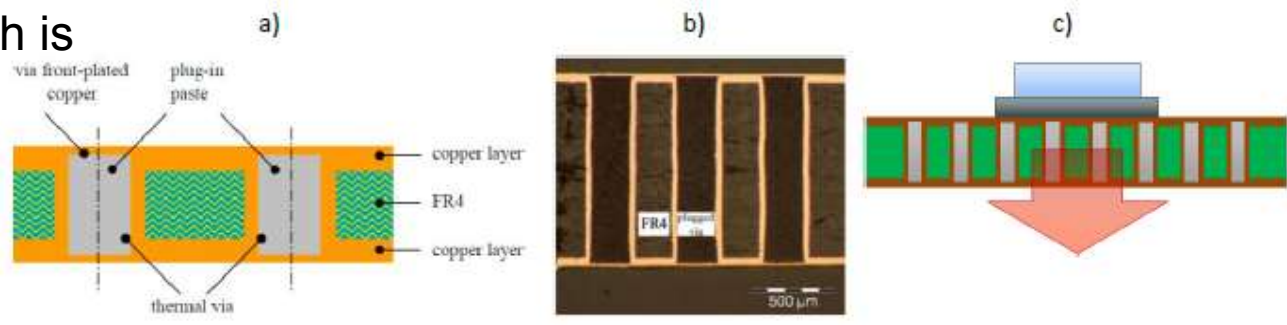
PCB with plugged thermal vias: a) Scheme; b) cross section; c) thermal path
